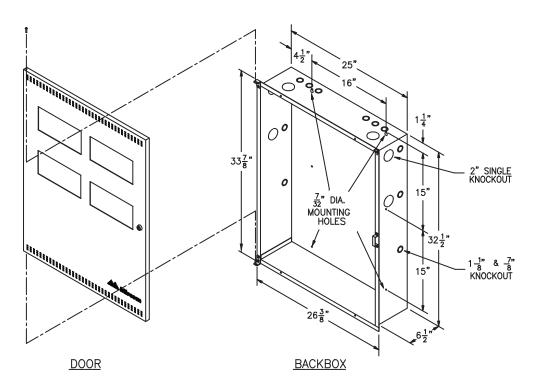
MMX-BBX-1072ADS Flush and Surface Installation and Dimensions
